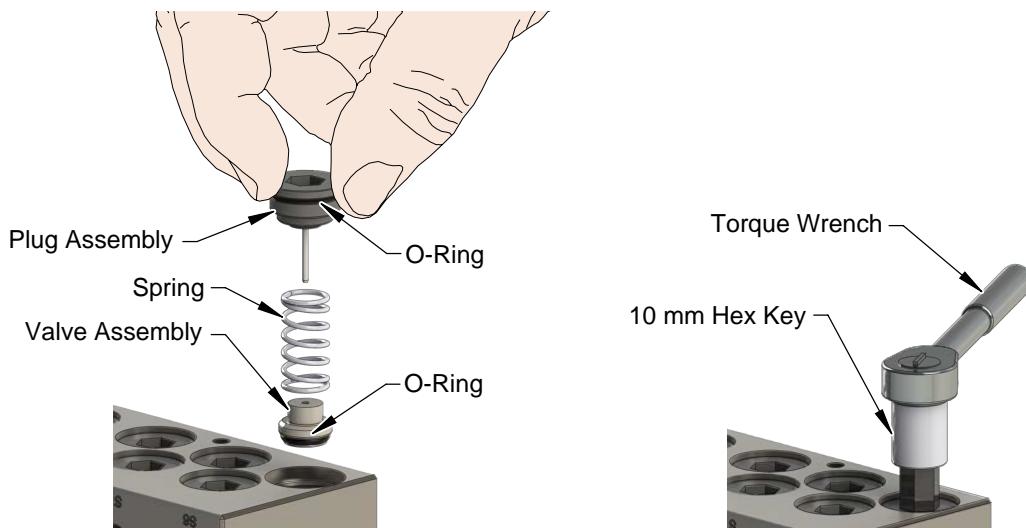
Tool Self-Sealing Valve (Disassembly)
